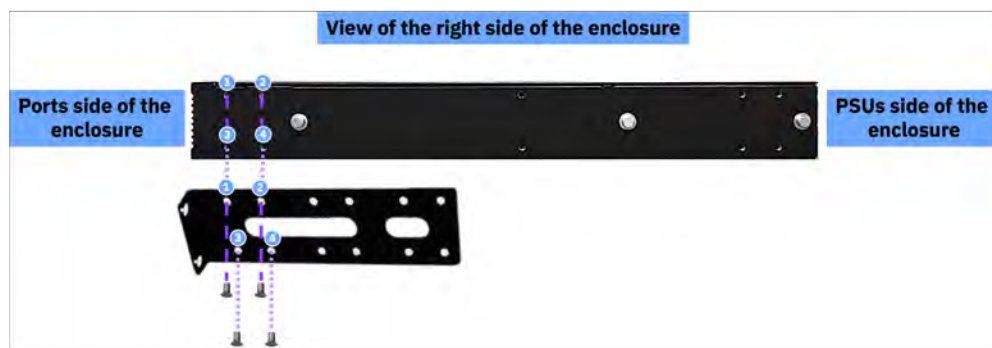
Attaching the rack brackets to the MTM 5149-S54 switch enclosure
